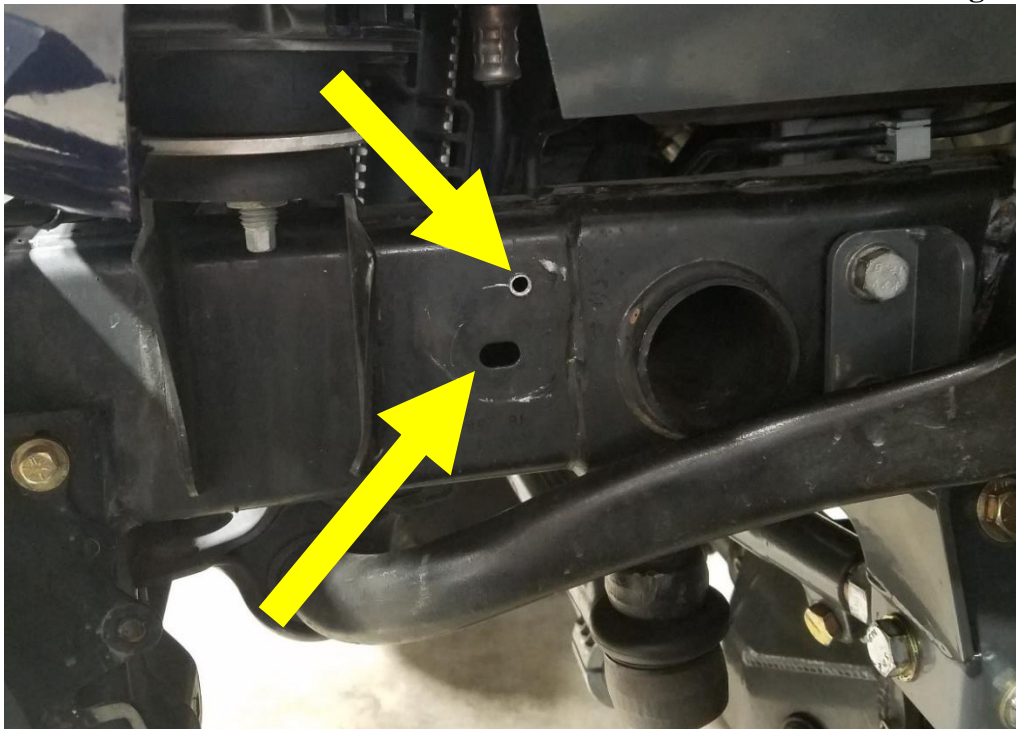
Disconnect Bracket Mounting Holes, Left Side.
